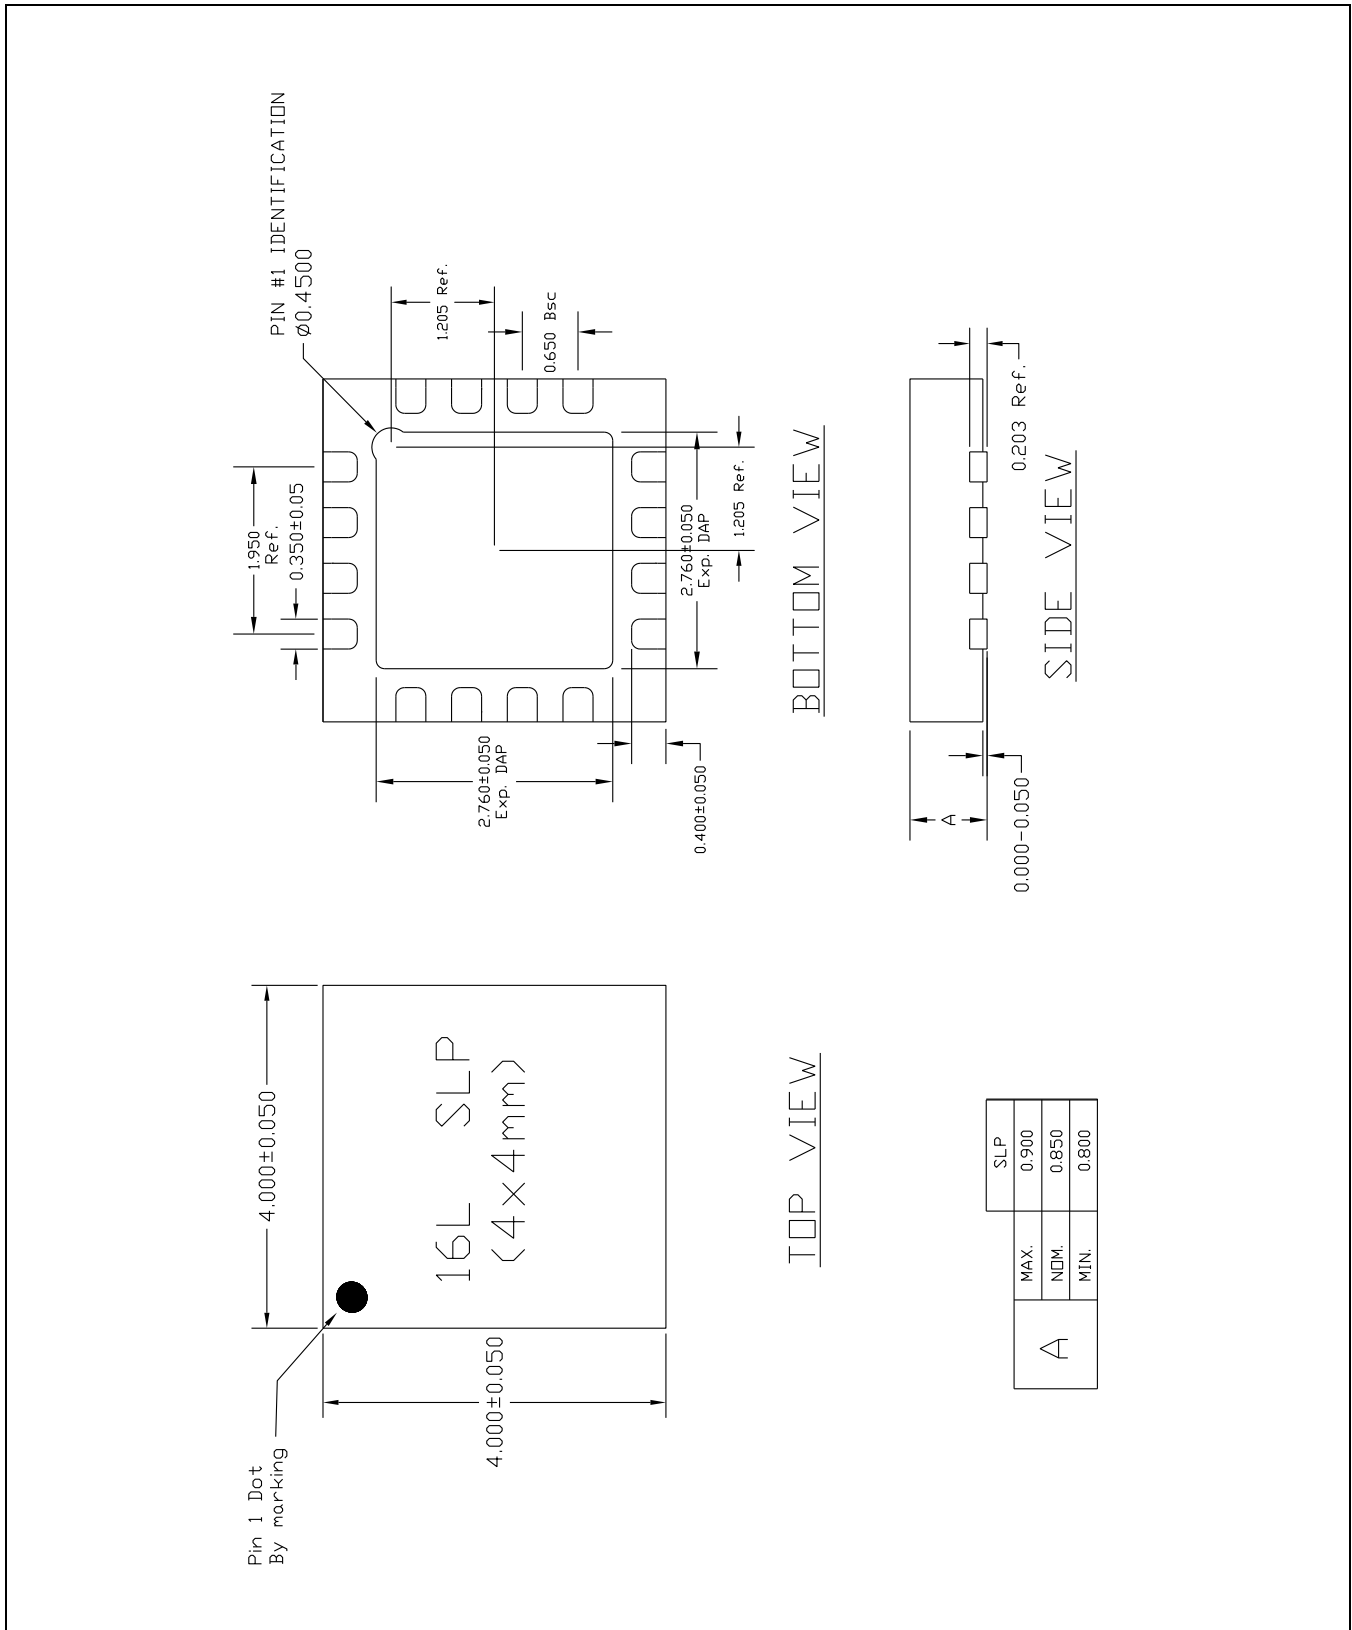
Package Drawing (4x4 mm MLF Package)
